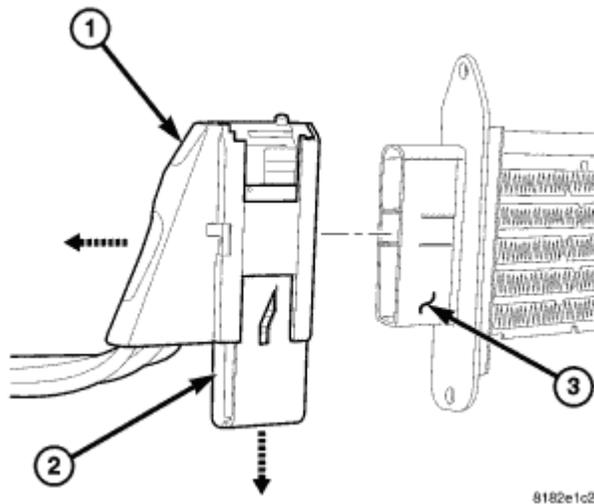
Wire Harness Connector, Wire Connector Lock & Positive Temperature Coefficient (PTC) Heater Unit
